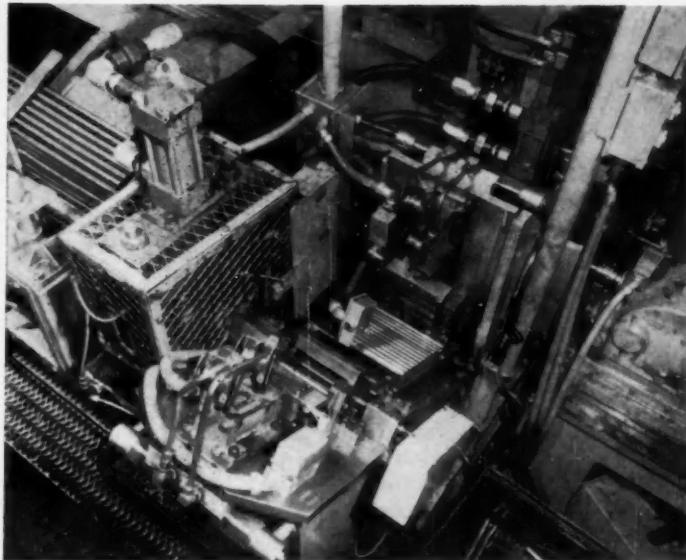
Start of the mechanized line for processing short welded steel tubes cut from long lengths by a knife inside the cage. Each length is discharged into the inclined magazine and a slide pushes the length into an indexing fixture.
